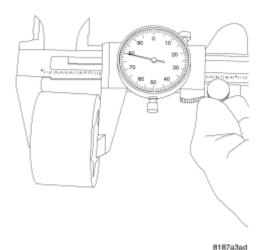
CLEARANCE OVER ROTORS Courtesy of CHRYSLER LLC
